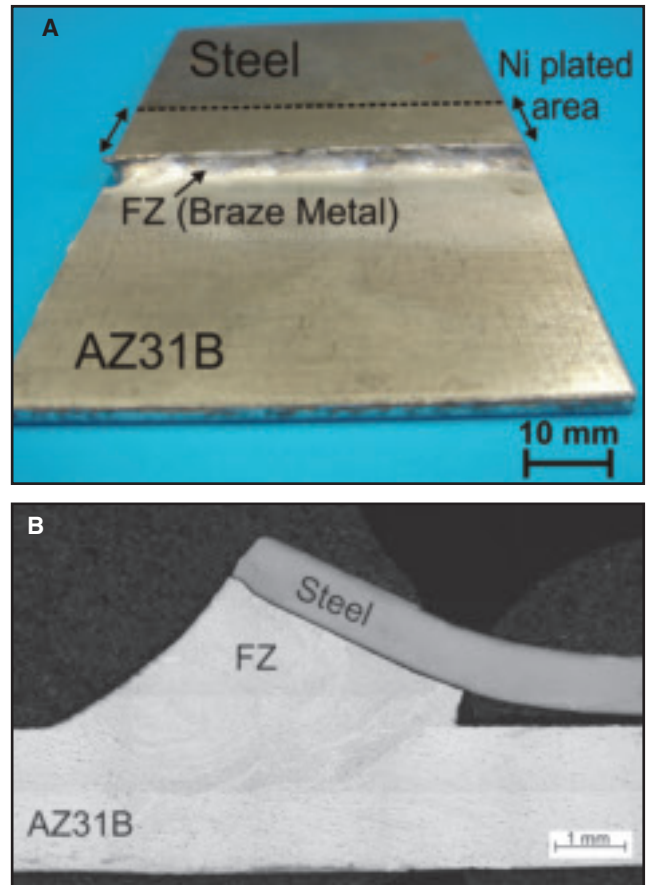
A laser-brazed Ni electroplated steel/AZ31B joint made using 8 mm/s travel speed and 2.2-kW laser beam power: A — Top bead; B — transverse section of the joint.
